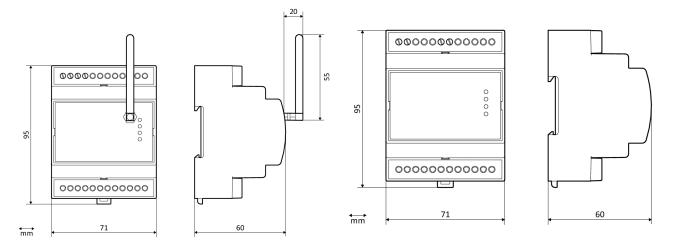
Fig. 1 SIU-MBM-02 dimensions
